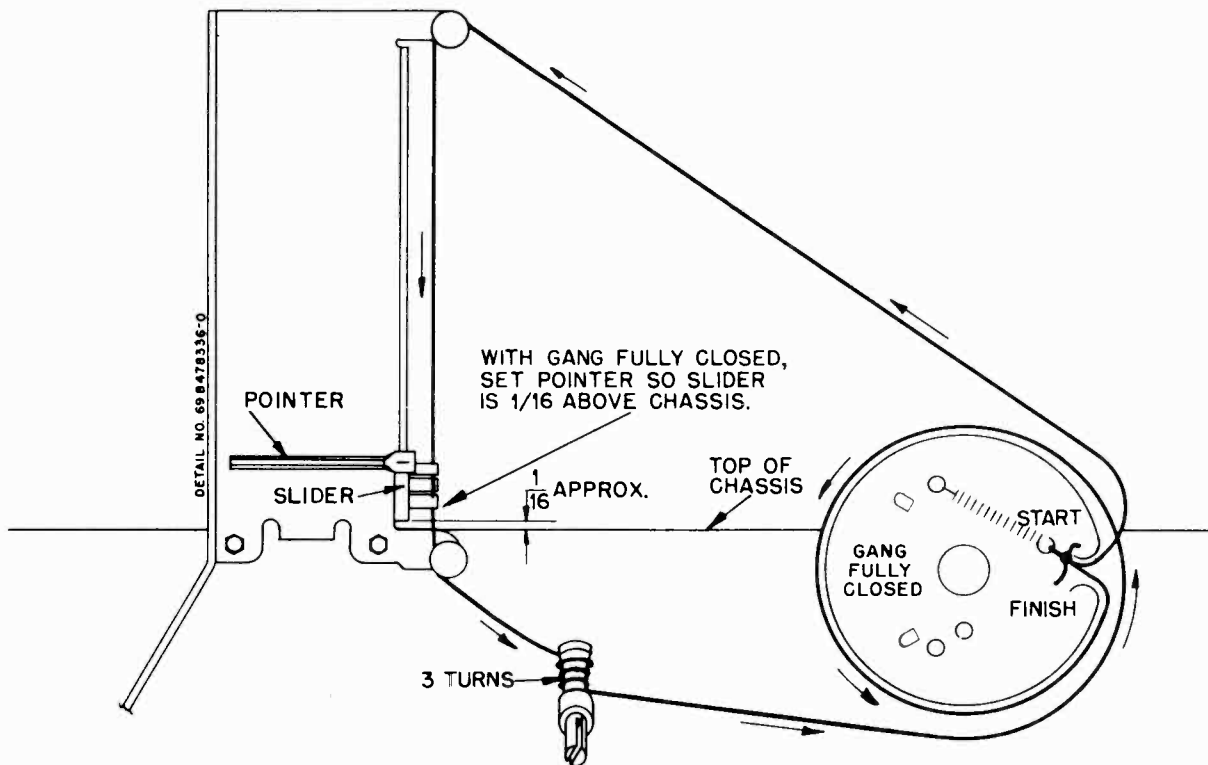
CHASSIS HS-124 STRING DRIVE DETAIL
